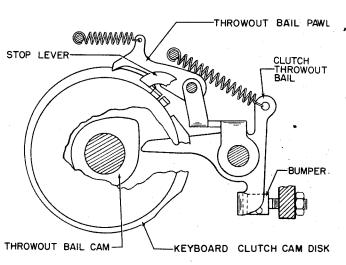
Keyboard Clutch Throwout Mechanism
